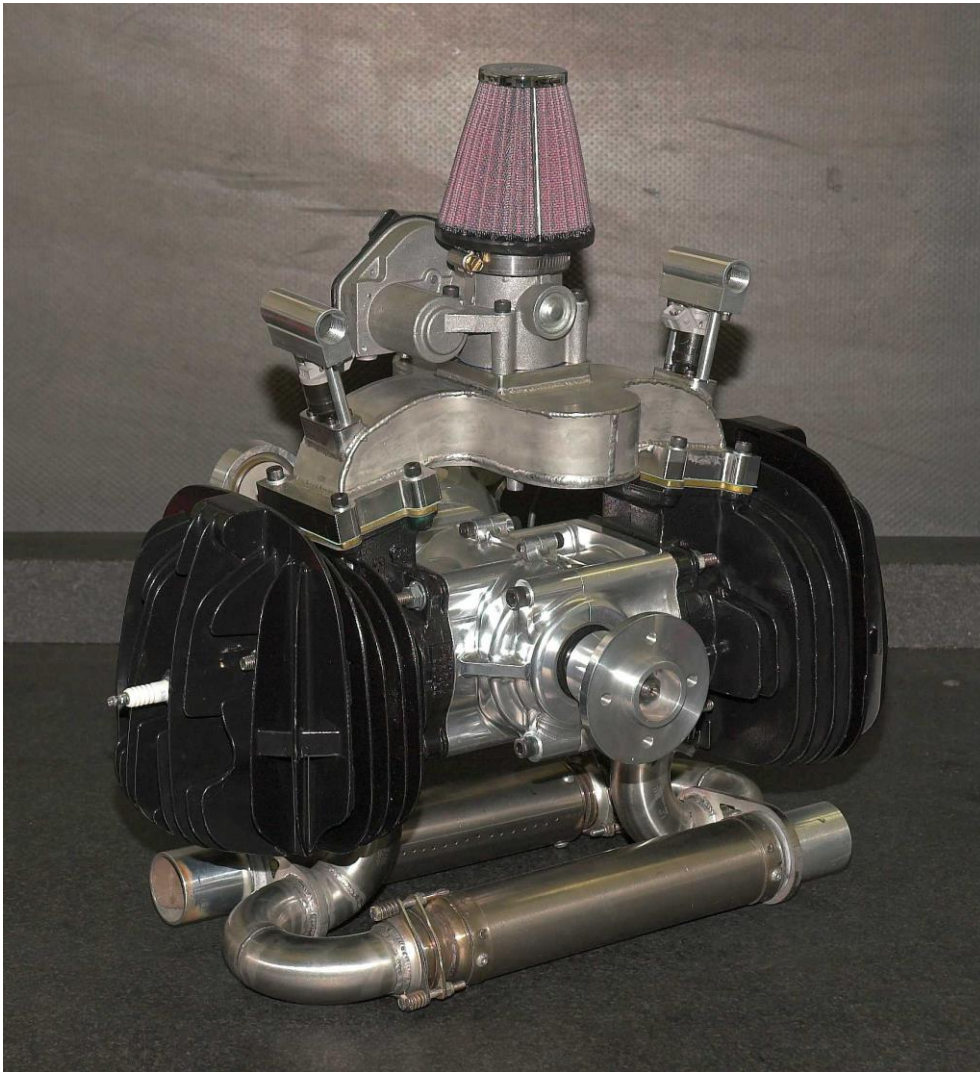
COMPLETED ASSEMBLY OF THE UAV ENGINE.
